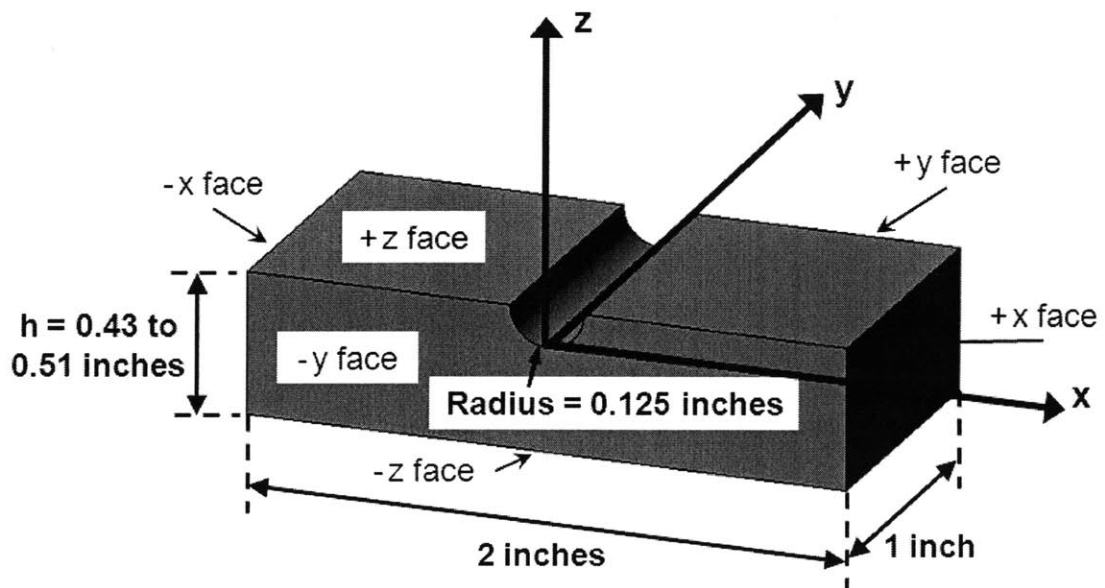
Schematic of specimen with dimensions, axes and labels indicating faces.
